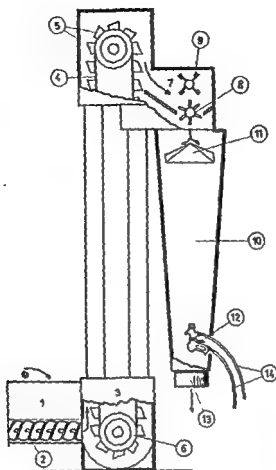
SALT-IODIZING MACHINE DESIGNED BY DR H. H. STACPOOLE
